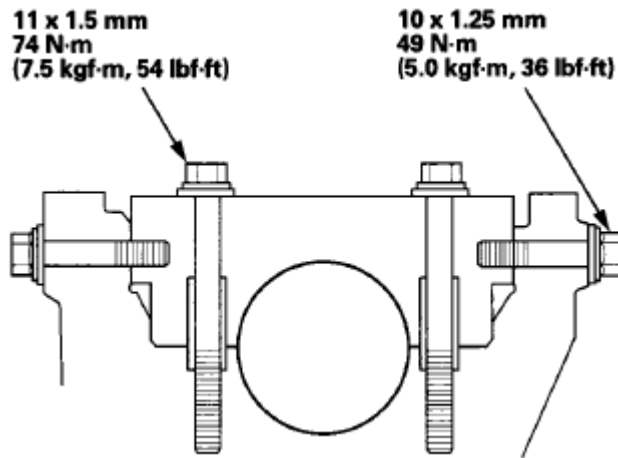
Identifying Main Bearing Cap Bolts With Torque Specifications
